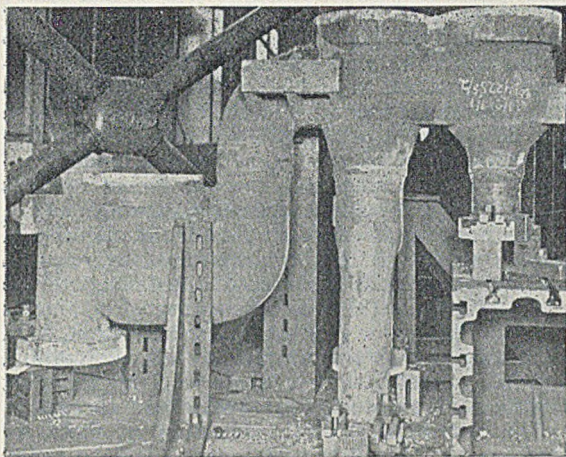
Parts of Composite Steam-chest Welded in Position.
